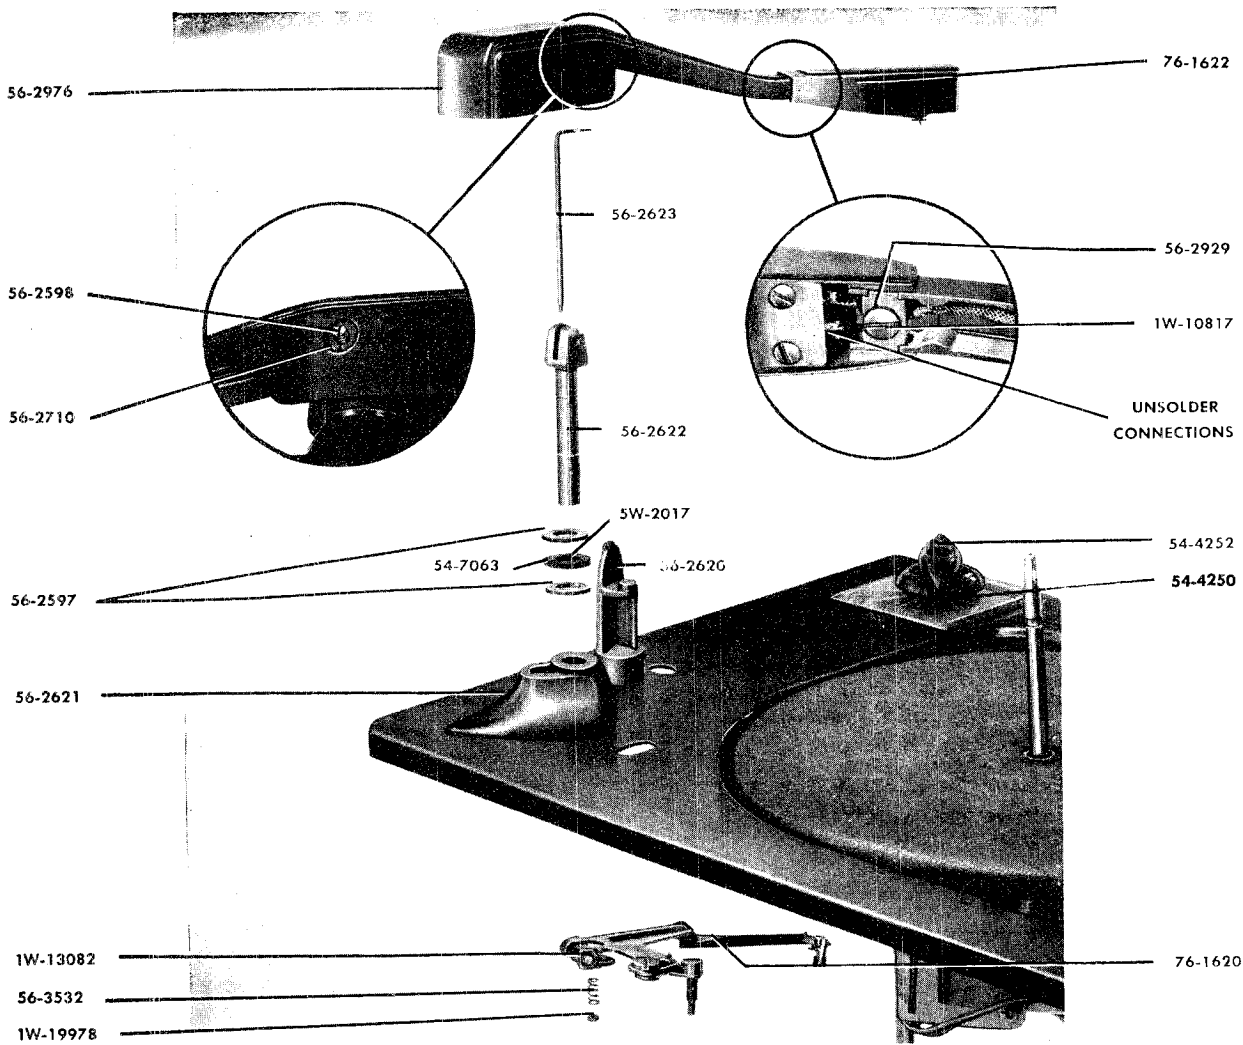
TONE-ARM-SHAFT AND TRIP-ARM ASSEMBLIES, EXPLODED VIEW.
